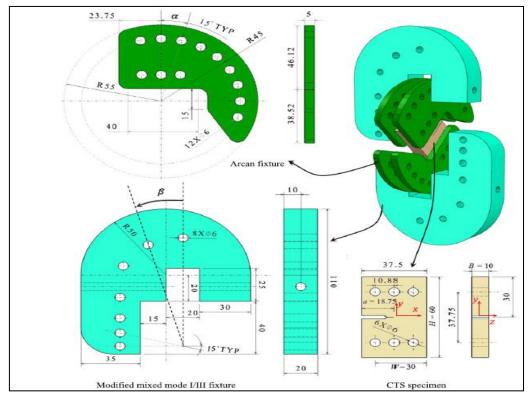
The fixture used for mixed-mode I-II and mixed-mode I-III Fracture testing [35]
